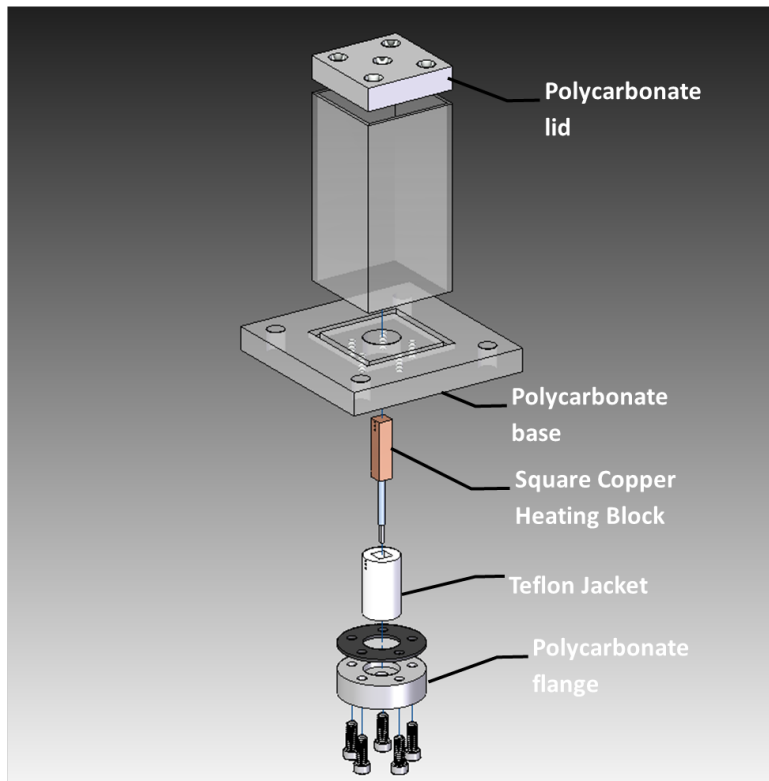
Exploded view of the PIV chamber showing the assembly of the copper heating block, borosilicate glass chamber, and a top polycarbonate lid with ports for sensors
